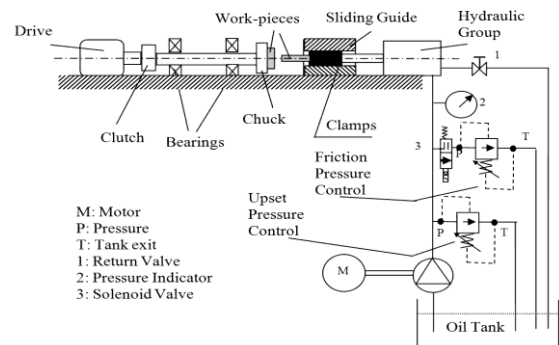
Rotary Friction Welding Set-Up [4].
